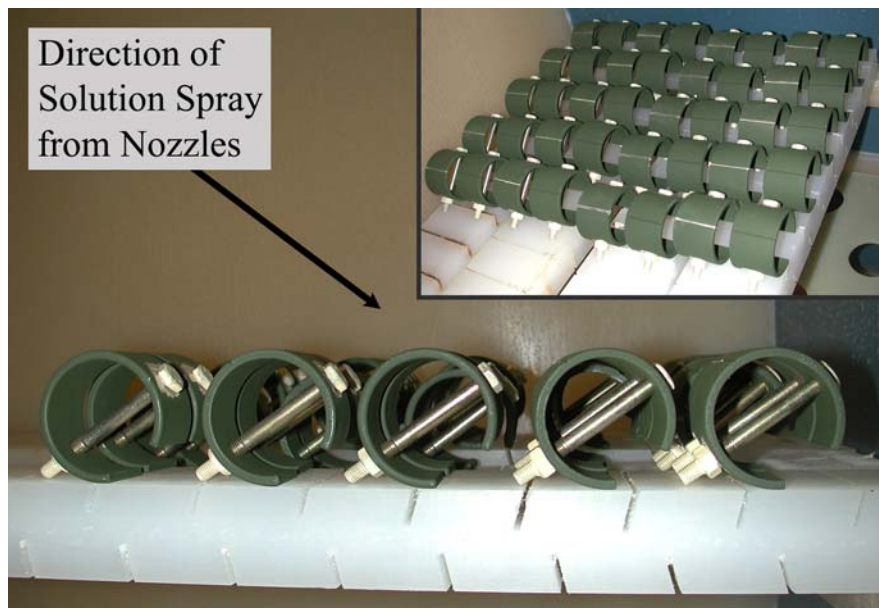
Damaged and undamaged 1d C-ring specimens arrayed in test chamber for GM 9540P exposure.
